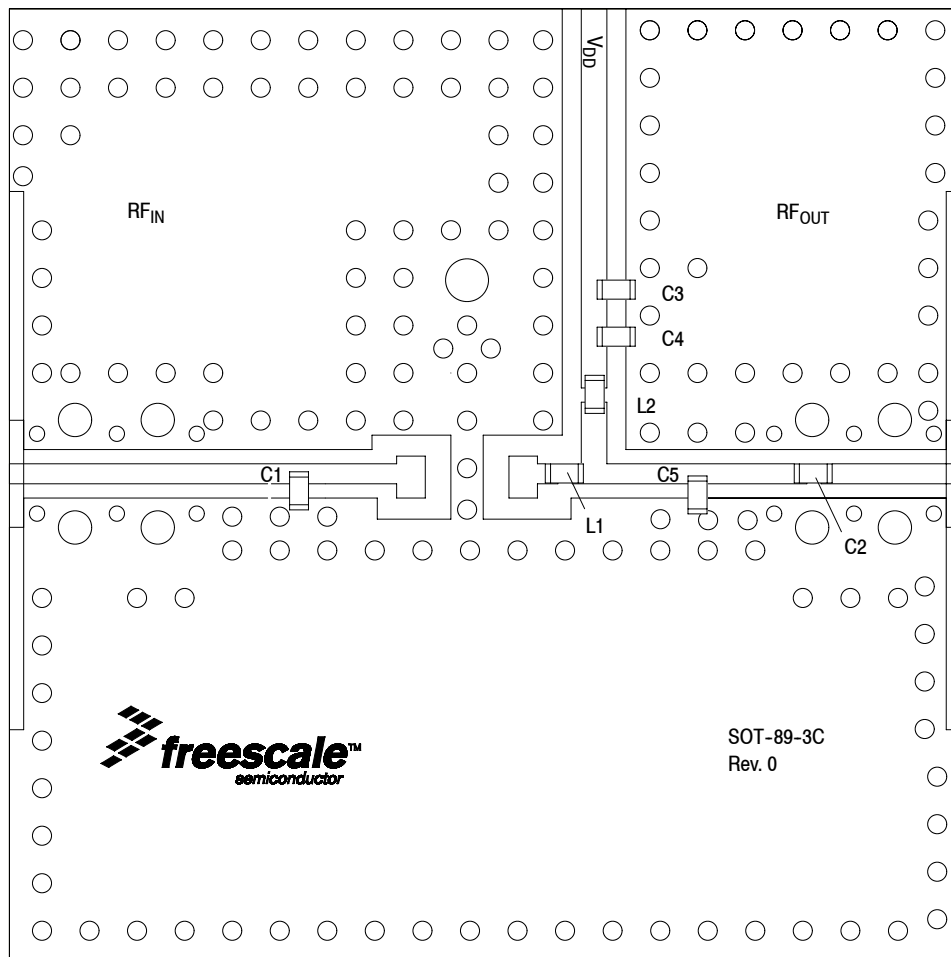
MMG20271H9T1 Test Circuit Component Layout
